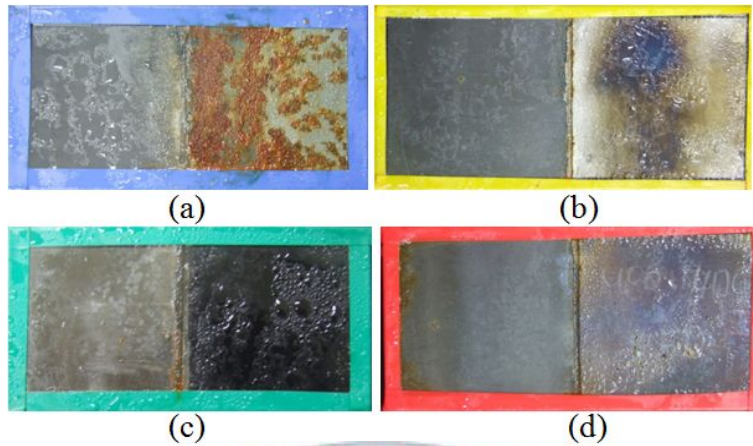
Appearance after salt spray test during 72 hours at welding specimen with LR-0727(1) coating solution. (a) SABC1470(850 °C)+SPFH590, (b) SABC1470(850 °C)+SPFC980, (c) SABC1470(950 °C)+SPFH590, (d) SABC1470(950 °C)+SPFC980
